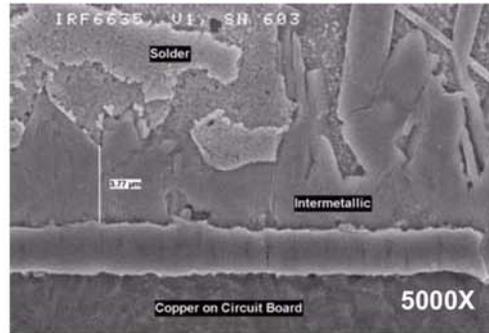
Cross-Sectional Analysis: Sn77.2:In20:Ag2.8 Soldered Assemblies
